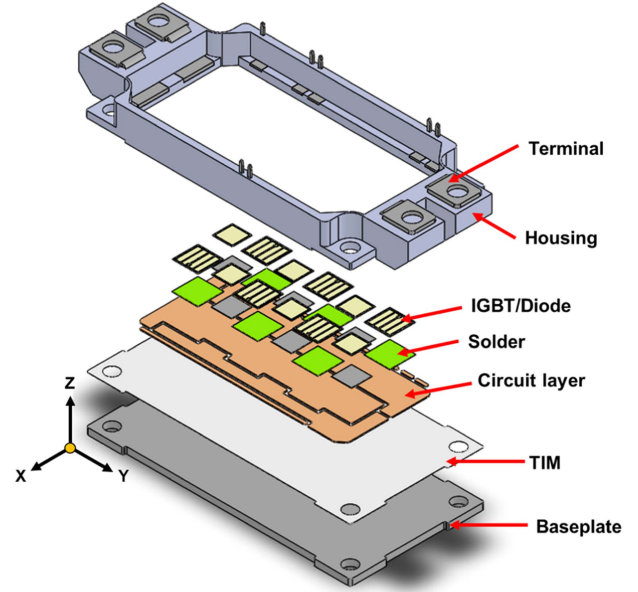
Exploded assembly diagram of power module with IMS substrate.
